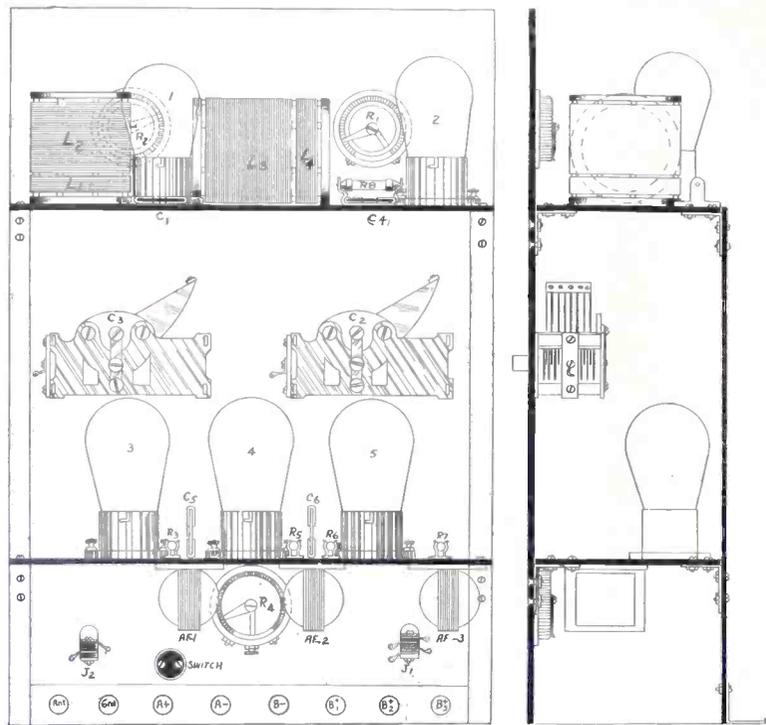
, showing how the back of the set appears. Note the side view on the right of the large drawing.
